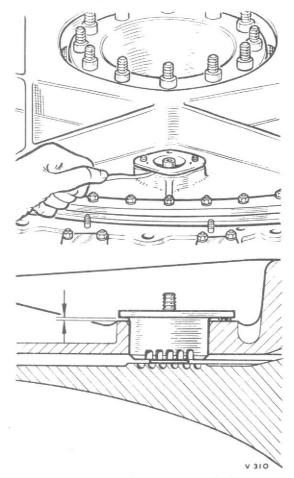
Using feeler gauges to measure the clearance between the inspection cover flange and sealing plate
